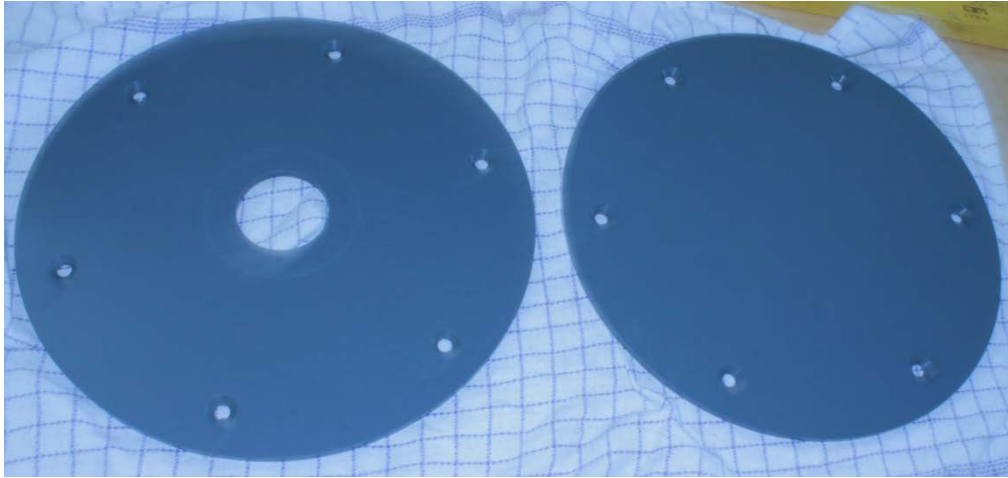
A. Top disk (left) and bottom disk (right) attached to cylinder during drag measurements.
